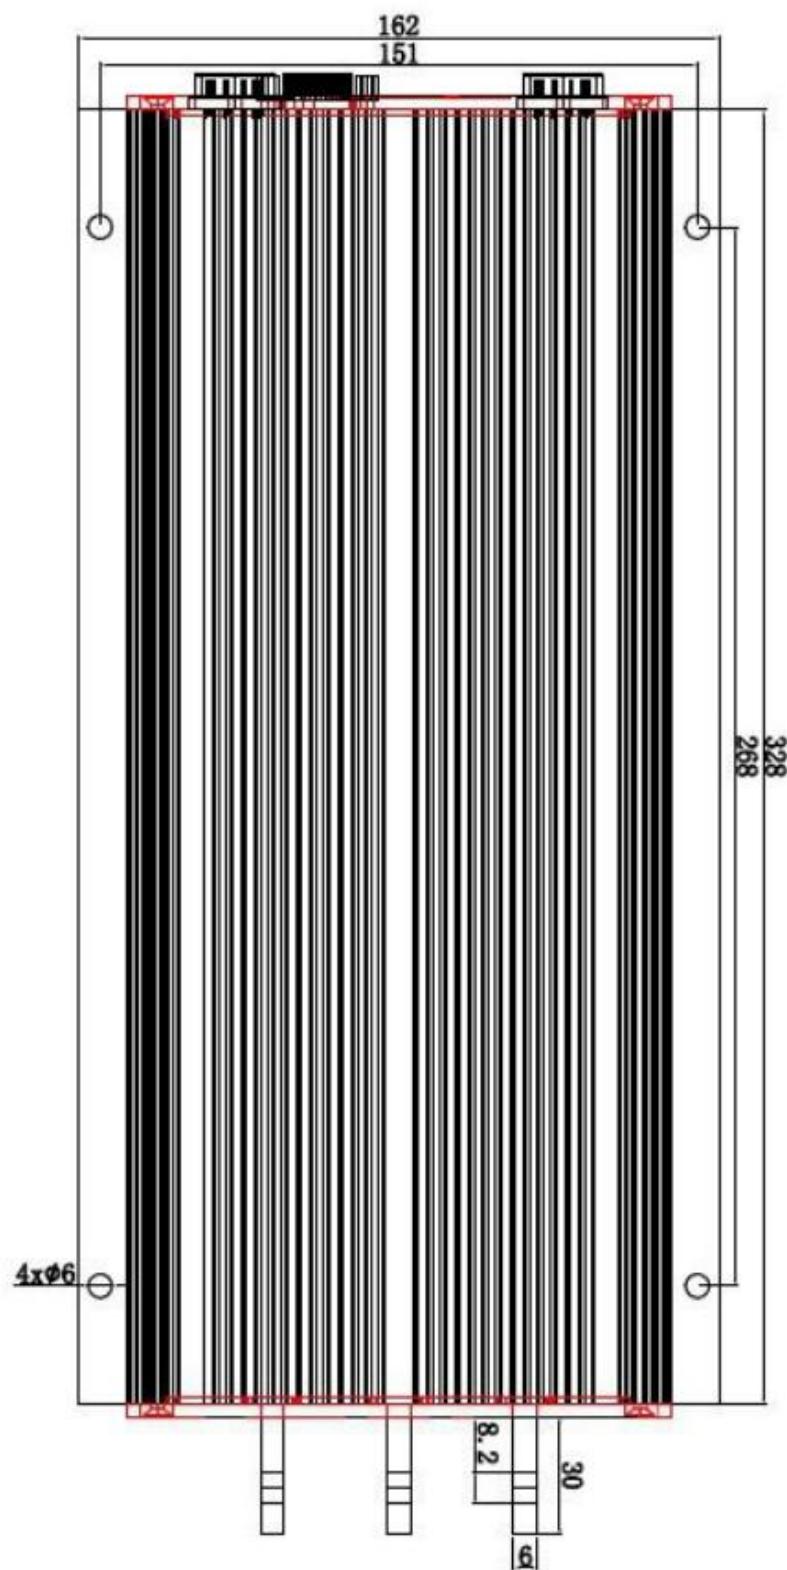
KHB mounting holes' dimensions (dimensions in millimeters)
